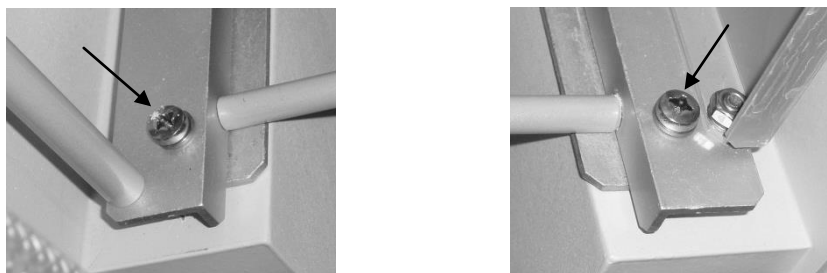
Left and Right Hydraulics Rail Screw Locations
